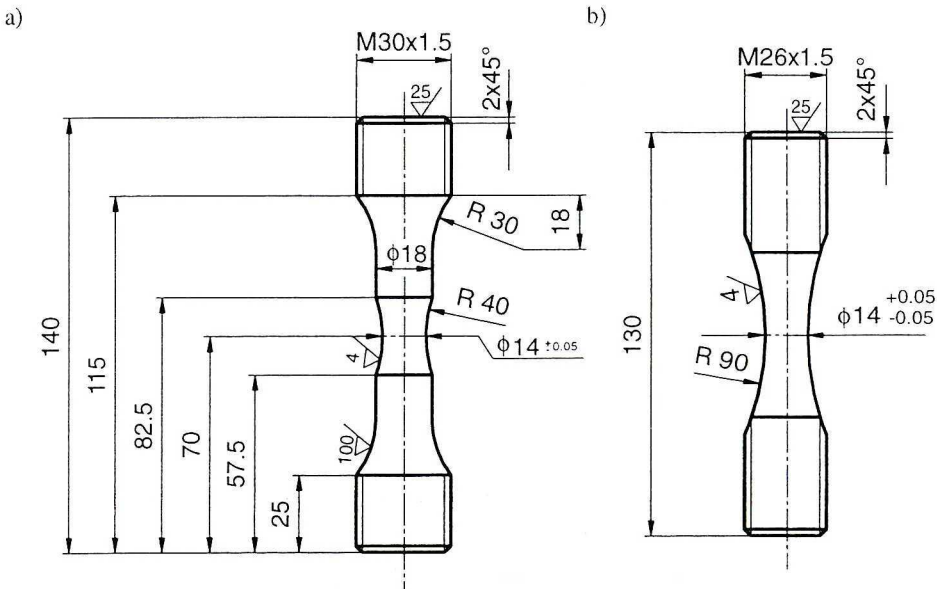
Specimens used in tests a) cast irons GGG40 and GTS45, b) cast iron GGG60
